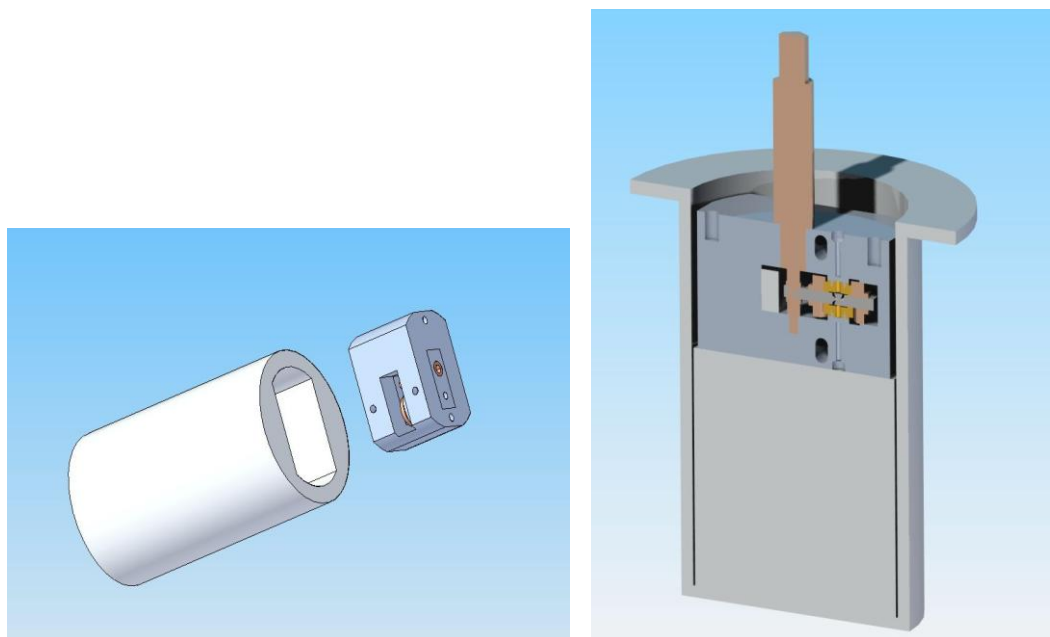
CAD drawings (a) The assembly of the gearbox for gas-loading. The large aluminium can on the left is used as the gas displacer inside the gas loader. (b) The assembly of the gearbox for cryo-loading.
